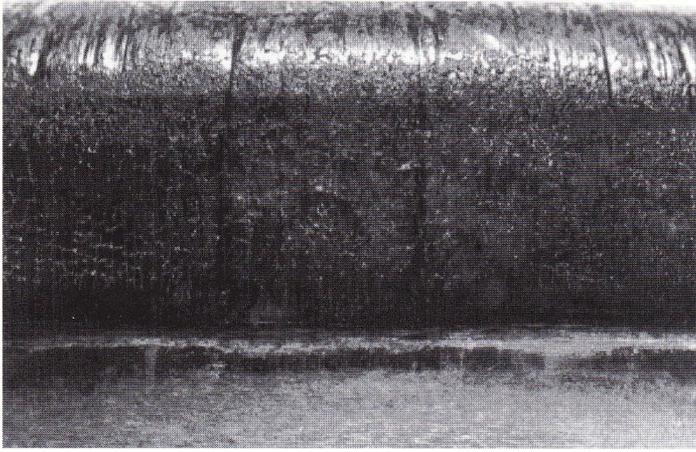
Blended and belt regions of the examined extrusion punch for warm forging after 40000 strokes. The axis of the tool is vertical
